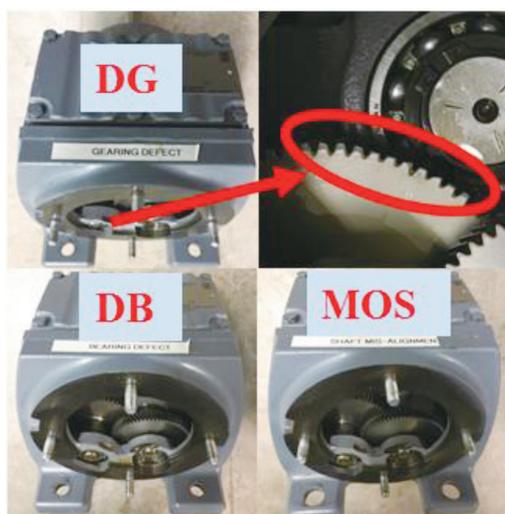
Faulty gear transmissions including those with gear defect, bearing defect, and misaligned output shaft.
